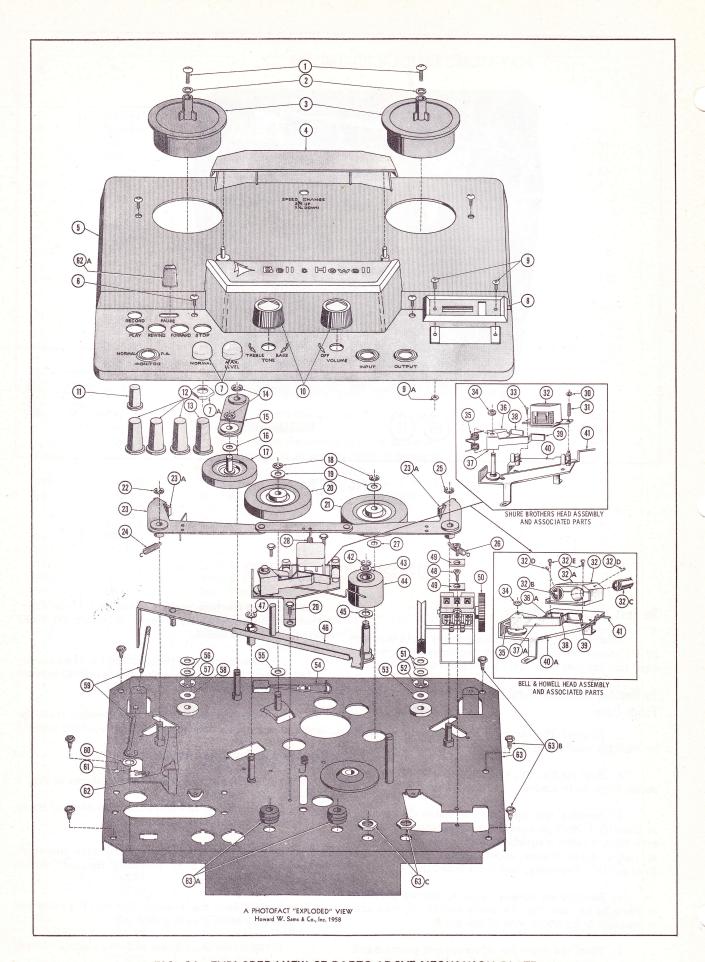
A. EXPLODED VIEW OF PARTS ABOVE MECHANISM PLATE.
